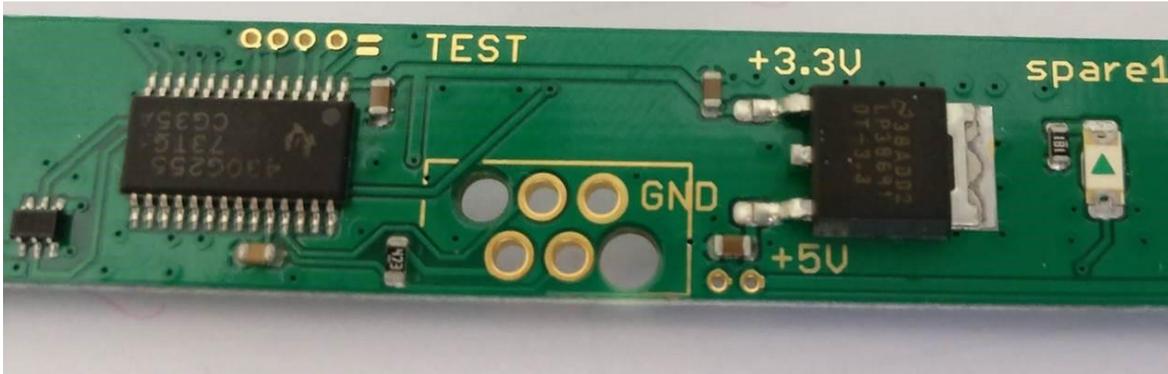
Layout and required space on the PCB (Source: WE eiSos)
